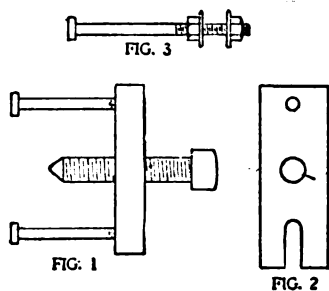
WHEEL PULLER COMPLETE. FIG. 2.—VIEW OF PLATE. FIG. 3.—LEG WITH NUTS AND WASHER.
